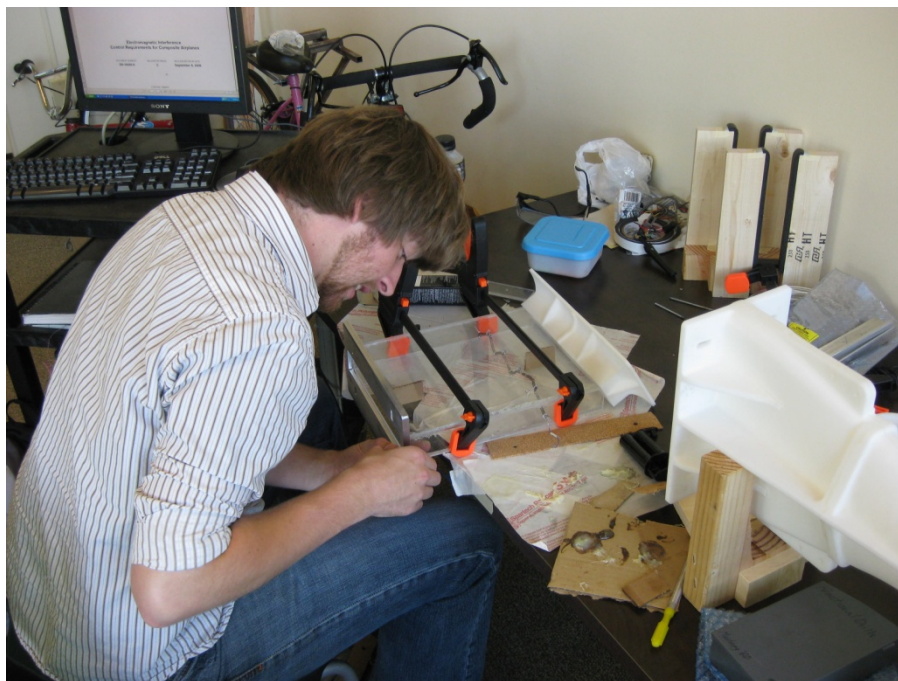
Aligning lower plate connector for fastening to inlet assembly
